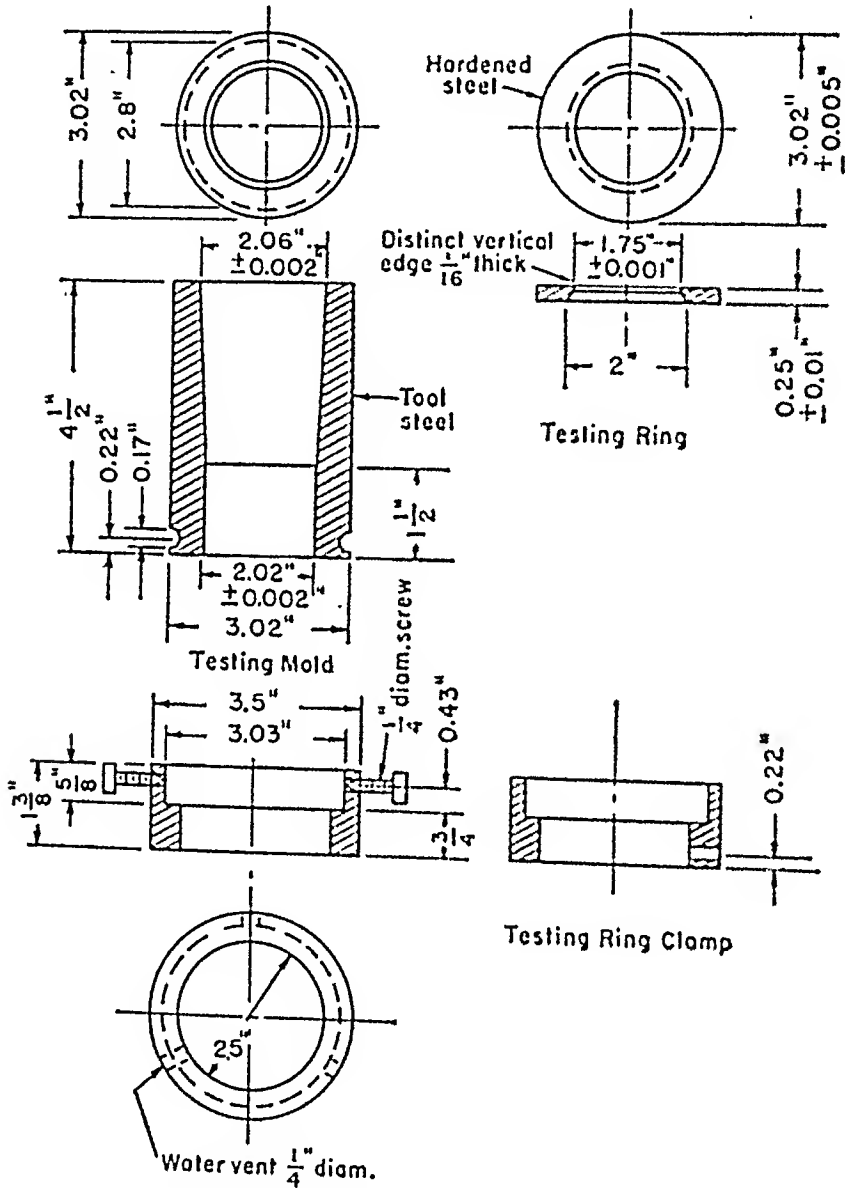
Testing Mold and Ring, Type 1. (Courtesy ASTM.)
